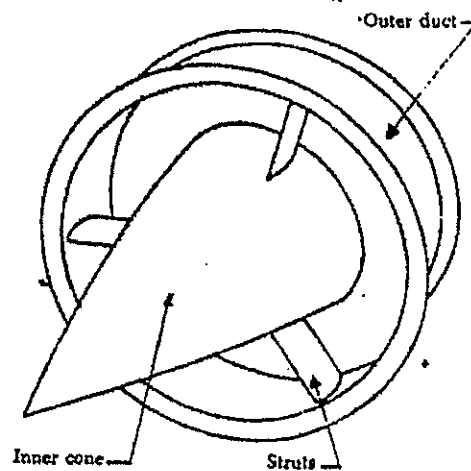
Exhaust collector with welded support struts.
